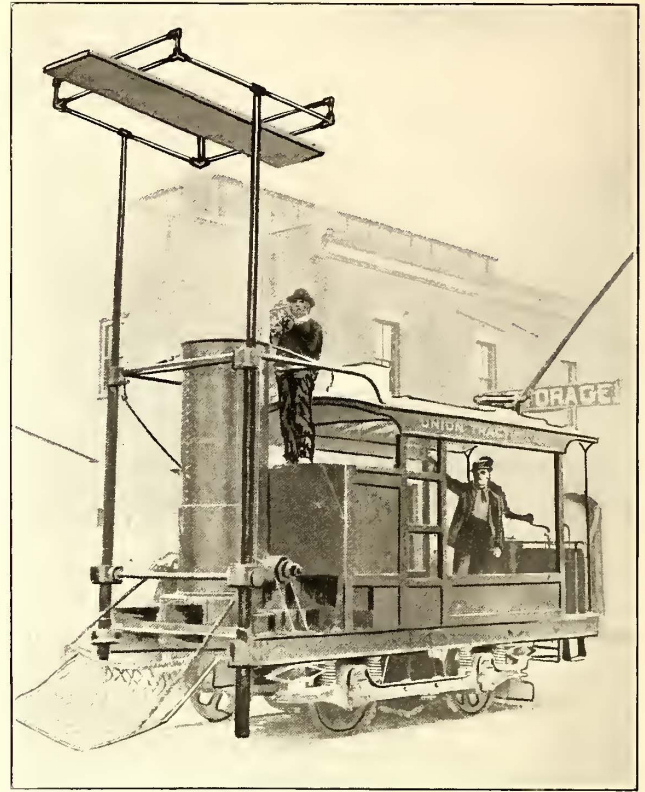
ELECTRICALLY DRIVEN CAST WELDING CUPOLA
